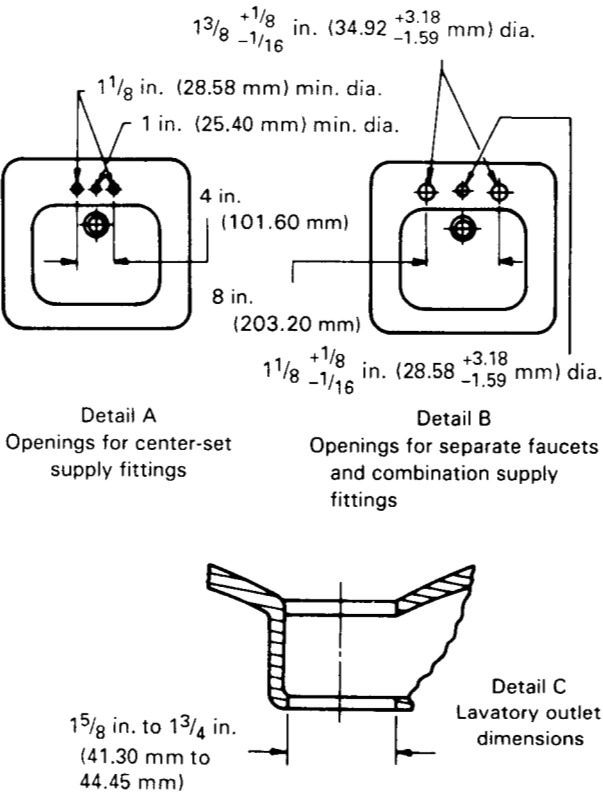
LAVATORY SUPPLY OPENINGS AND OUTLET DETAILS
